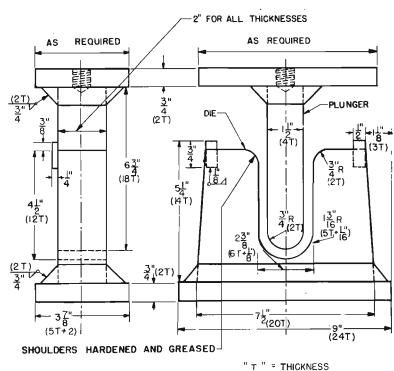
Die and plunger for guided-bend test of butt welds.
